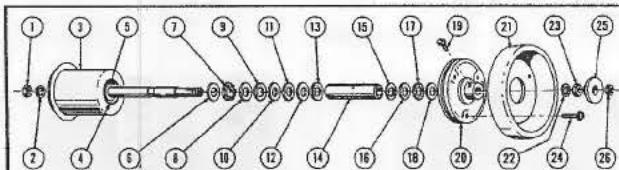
SHIM PROCEDURE FOR ASSEMBLING TURNTABLE SHAFT
